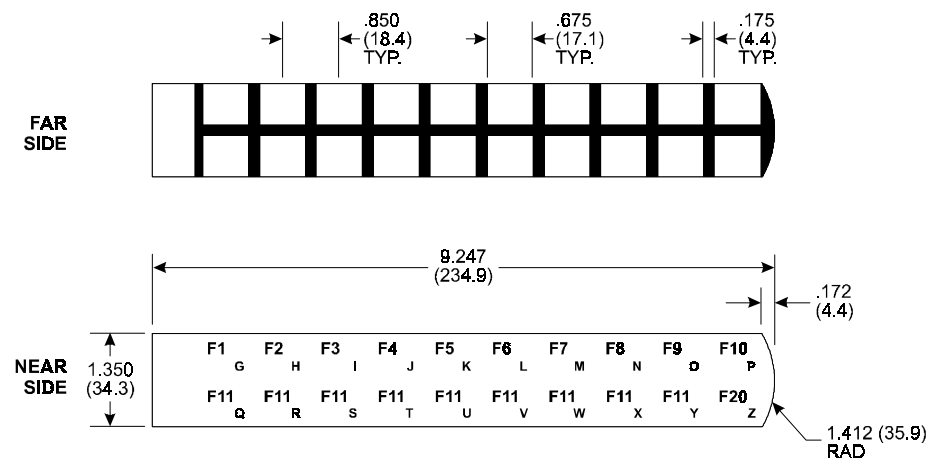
13. 9460KP/9462KP Insert with Dimensions (F1 - F20)
